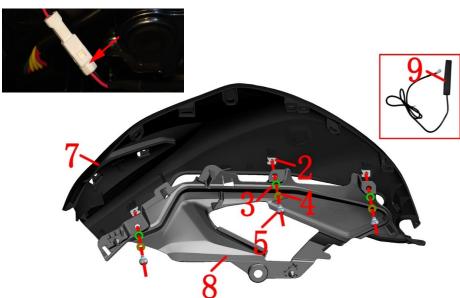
FUEL TANK COMPONENT		Fuel tank assembly component 2	CHK	40)
